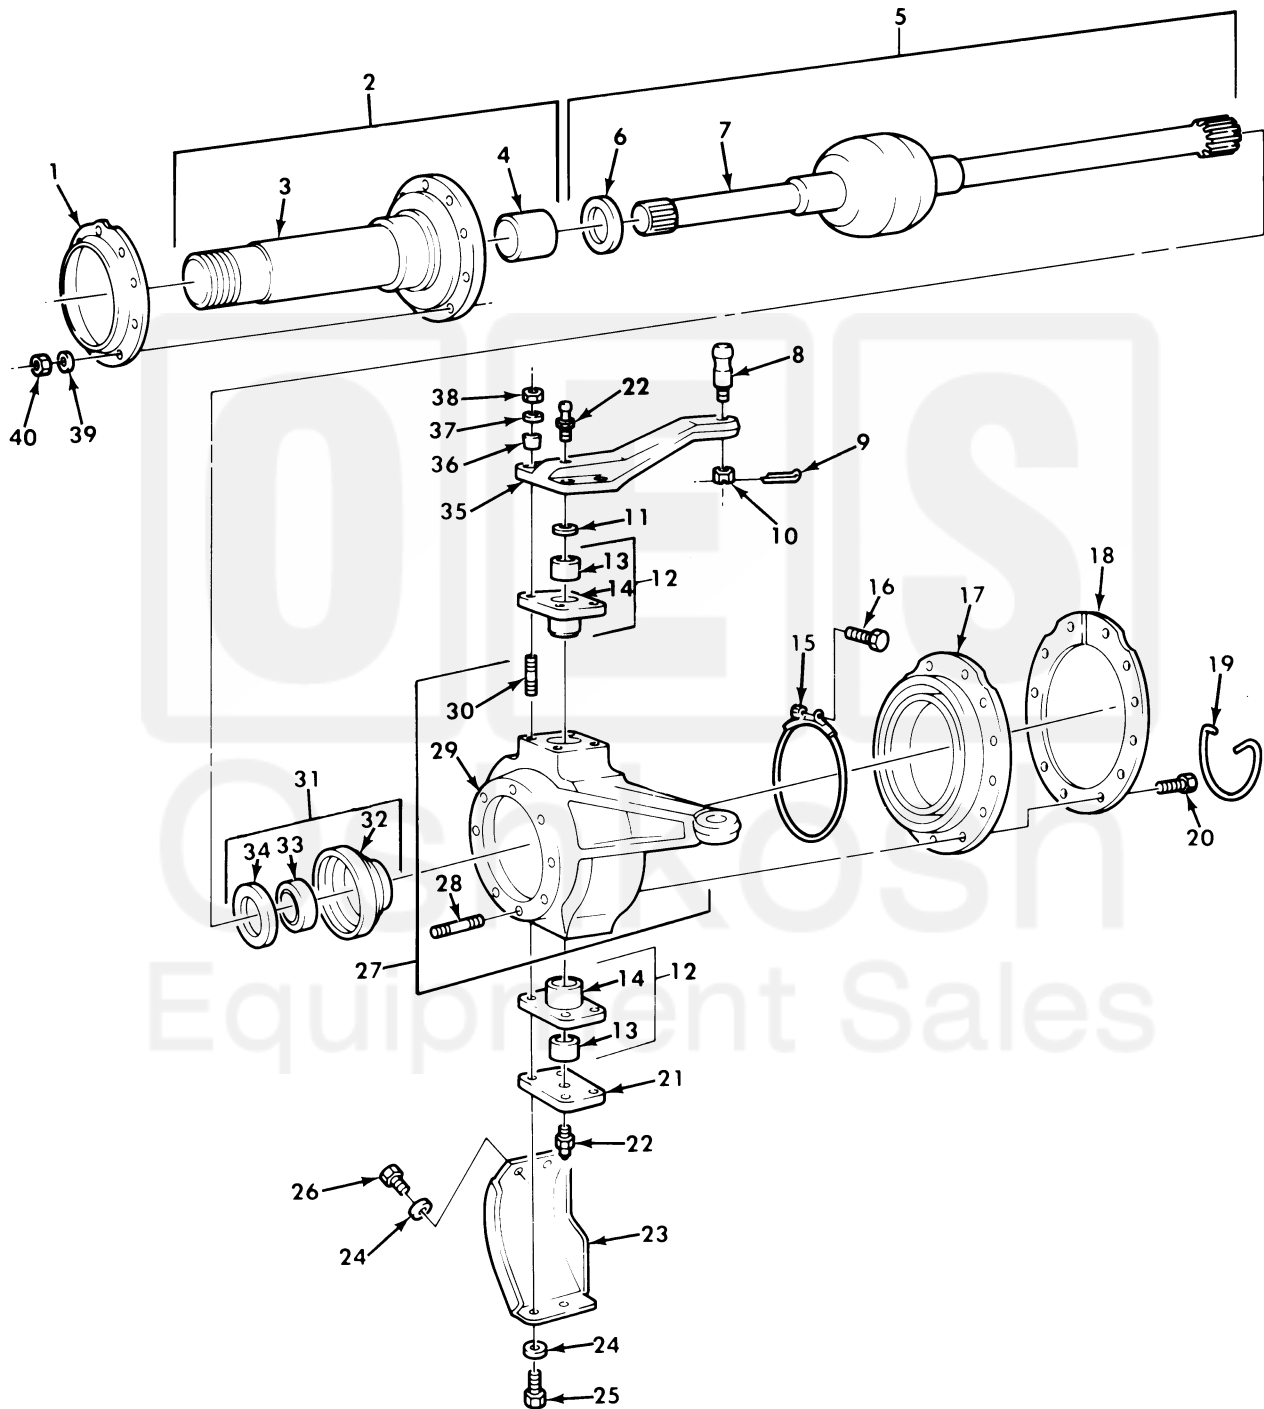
Spindle Shaft Assembly, Universal Shaft, and Knuckle Assembly.
